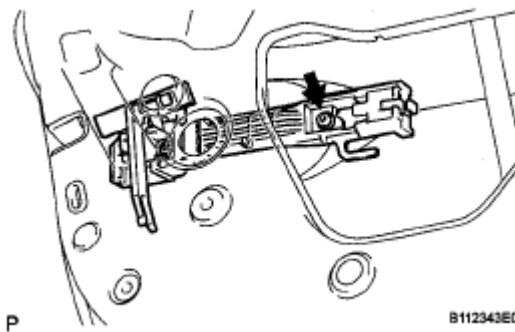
Locating Rear Door Outside Handle Frame Sub-Assembly Screw
